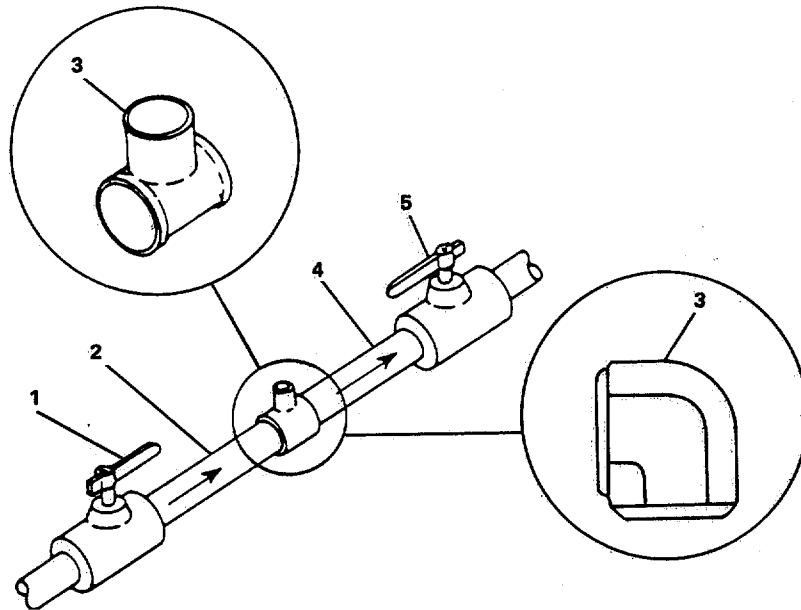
Repair Copper Solder Adapter Joints (Typical).
